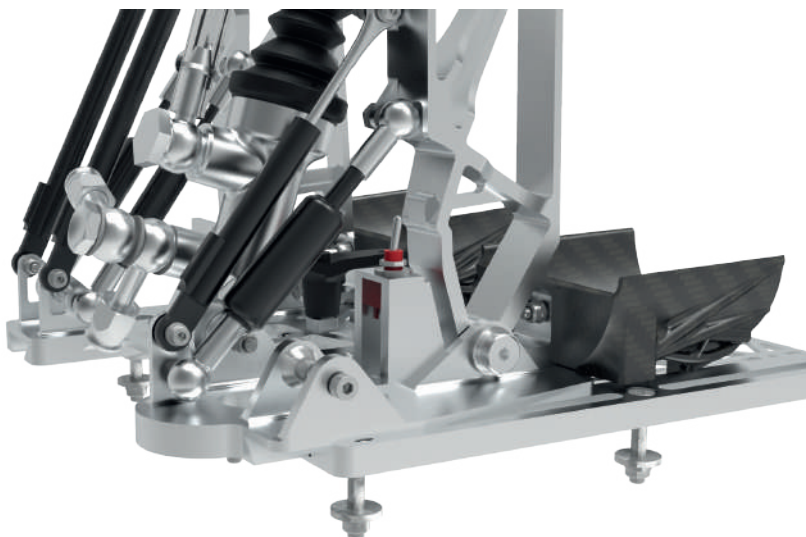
Enlarged Brake Trail and the new BOTS + stopper assembly
